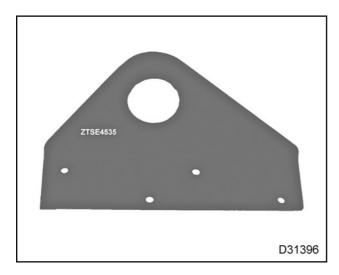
Cylinder Head Lifting Bracket ZTSE4535
